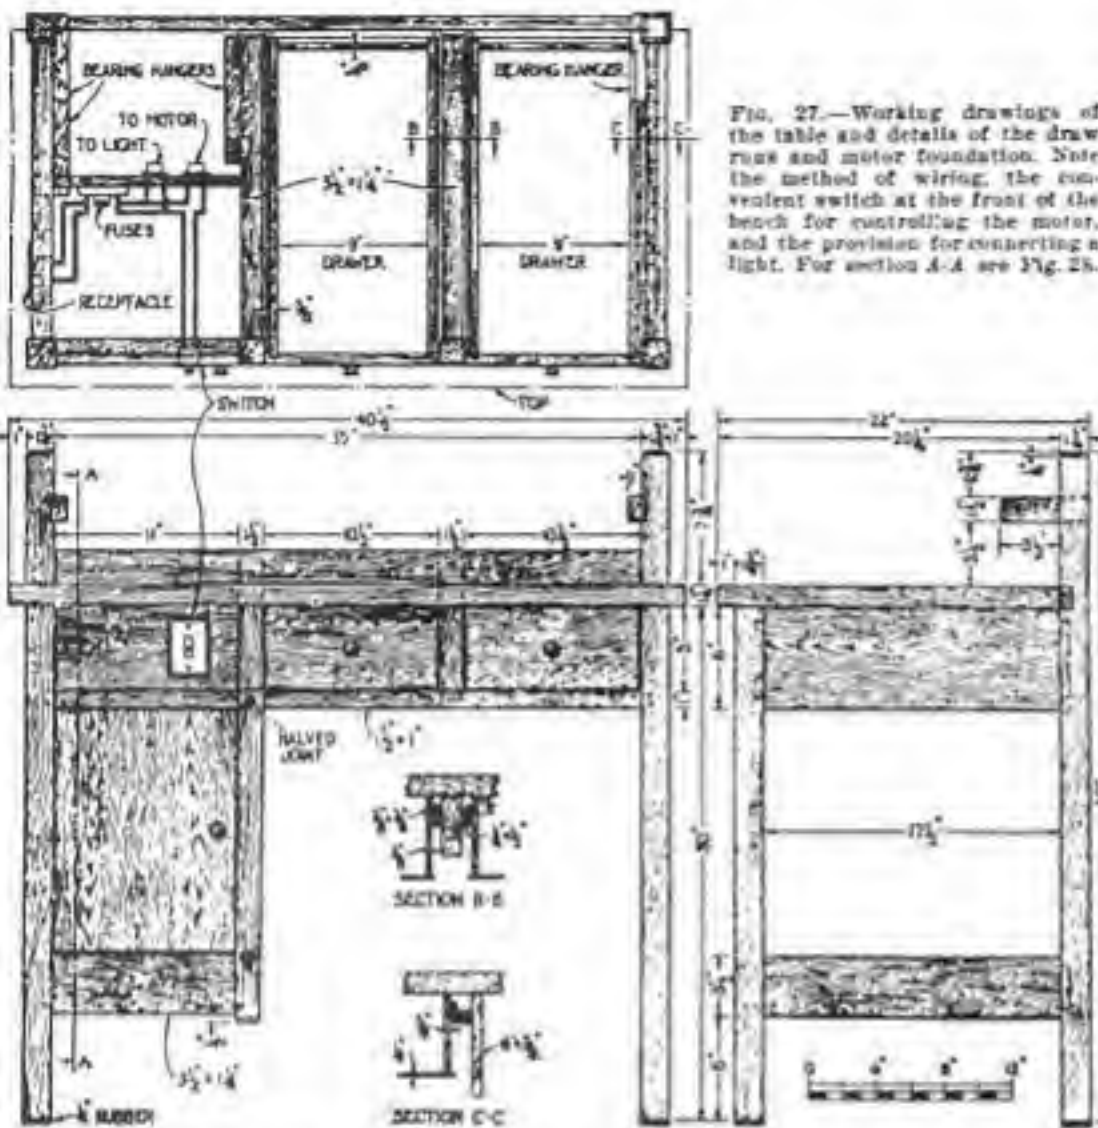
Working drawings of the table and details of the draw runs and motor foundation. Note the method of wiring, the convenient switch at the front of the bench for controlling the motor, and the provision for connecting a light. For section A-A see Fig. 28.
